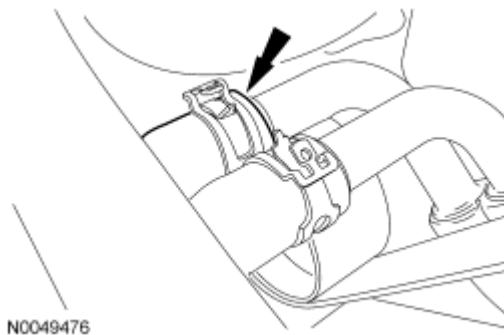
Disconnecting Coolant Hose From Charge Air Cooler (CAC)
